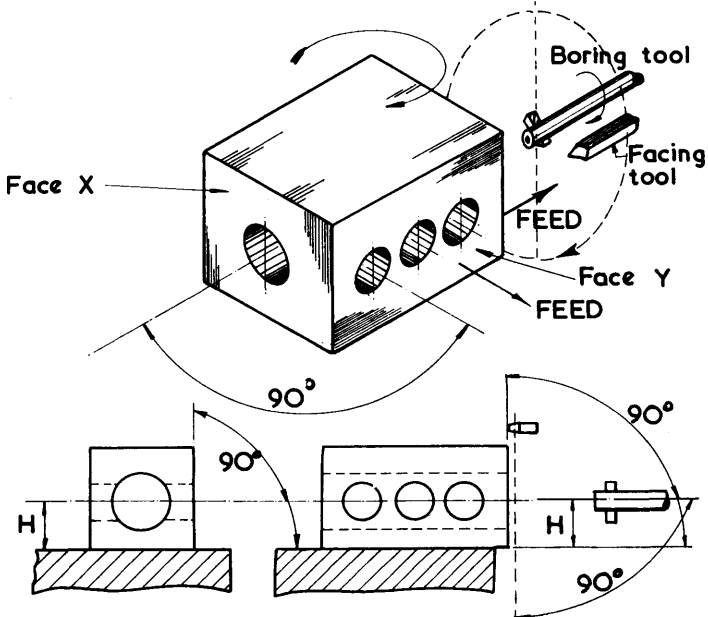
Essential Movements of the Horizontal Boring Machine.
